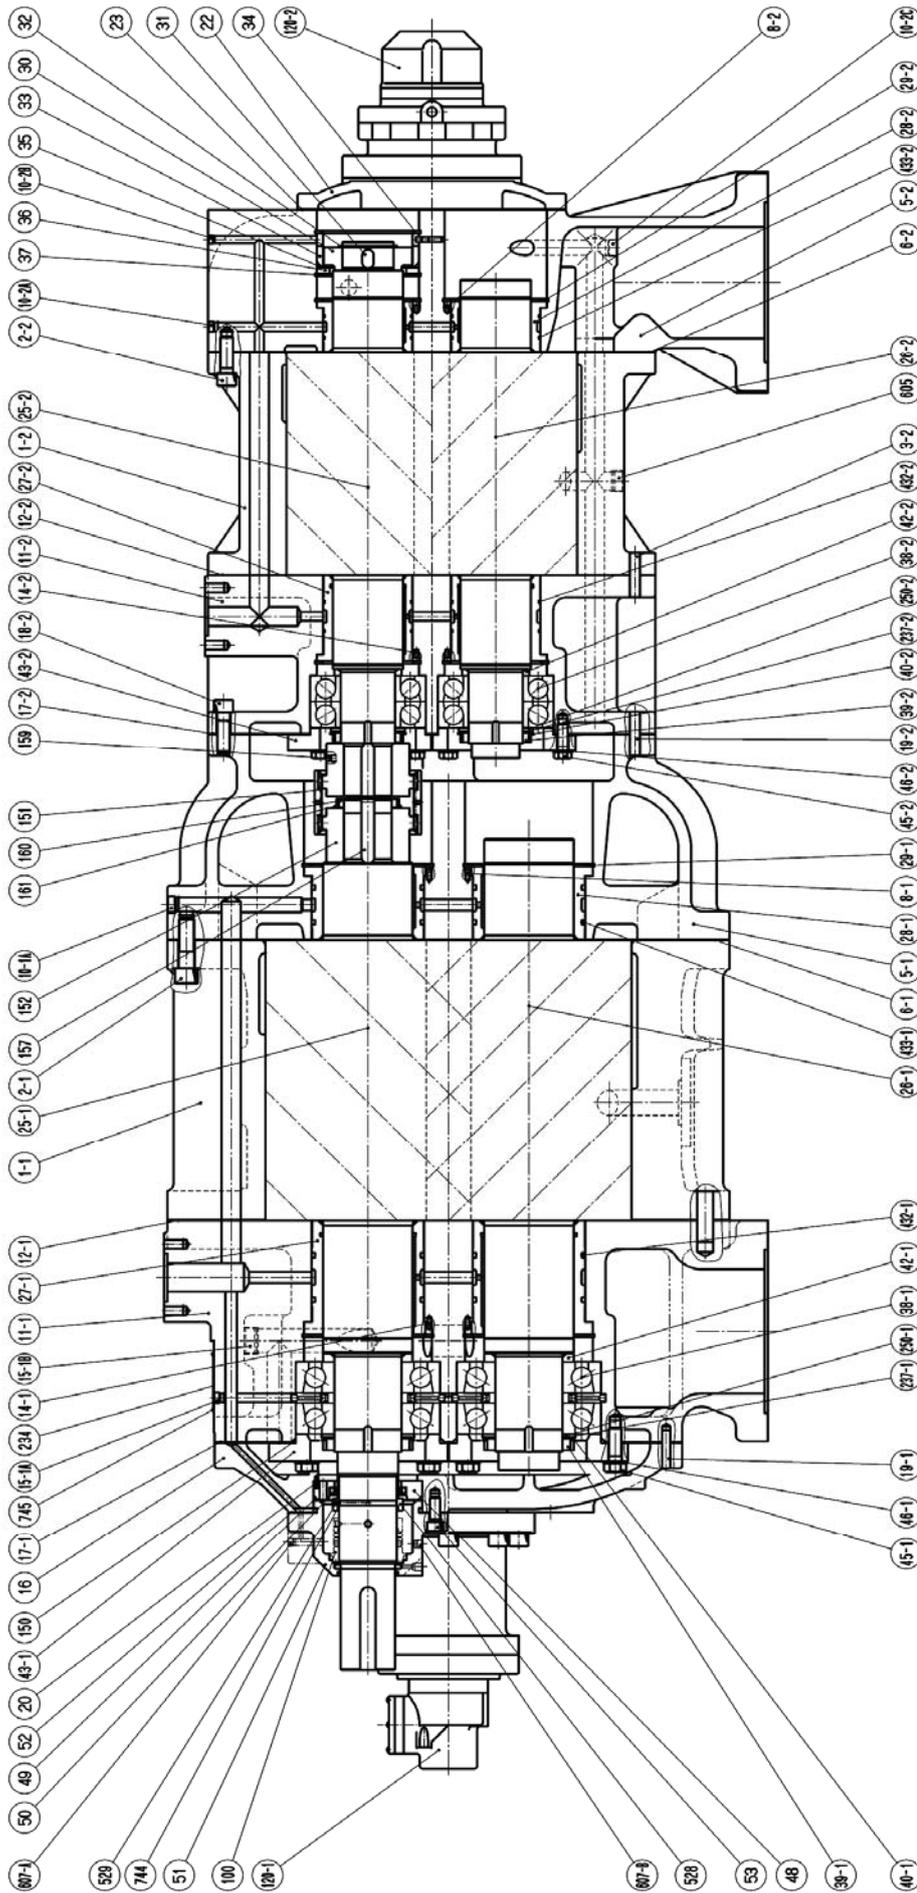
3225MMC Assembly Sectional View (Horizontal)
